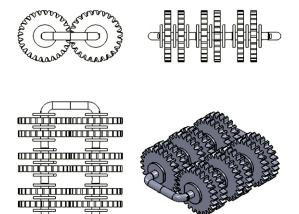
This gear was designed to test how much the center distance can be varled before fusing occurs and or before the gears fail to mesh during rotations. The three gear pieces test separate sizes with 15-20 teeth. Gear pairs run the length of the design. The center distance is gradually increased by 0.5 mm.
